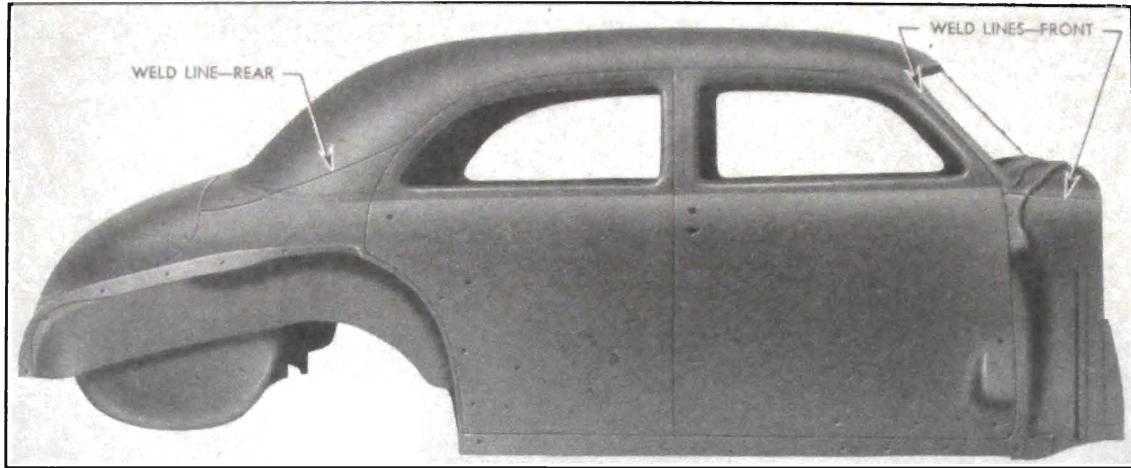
Sedan Body Showing Welding Lines—Series 50-70
